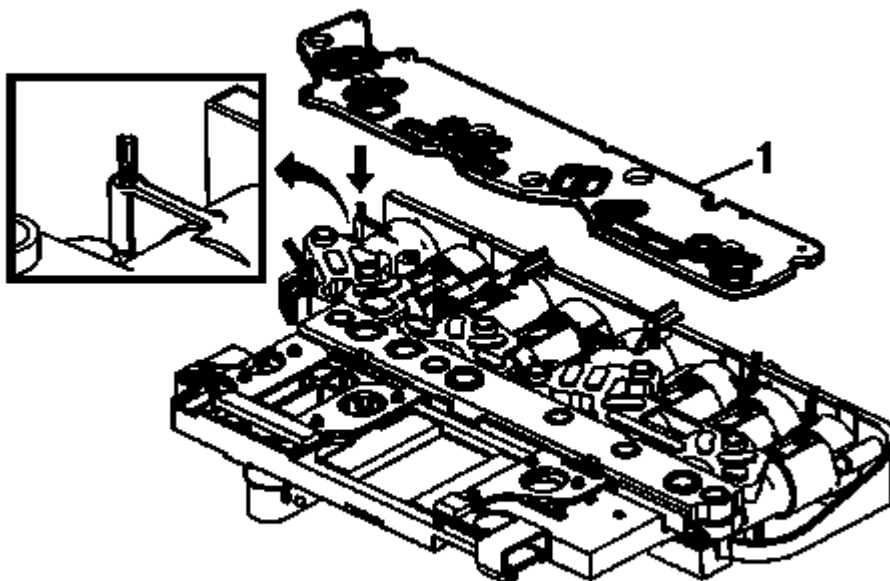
Identifying Control Solenoid Valve Assembly Filter Plate
